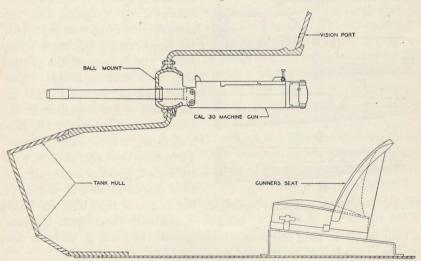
Section through Typical Ball Mount in Bow of Tank.
